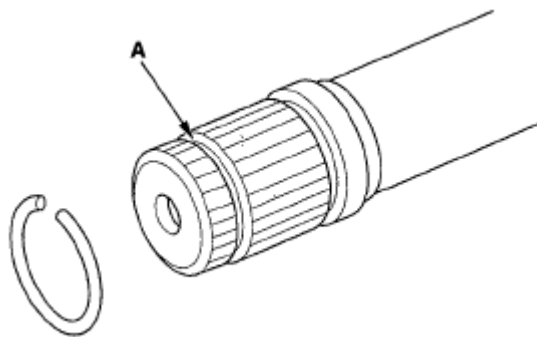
Identifying Stop Ring Into Driveshaft Groove
